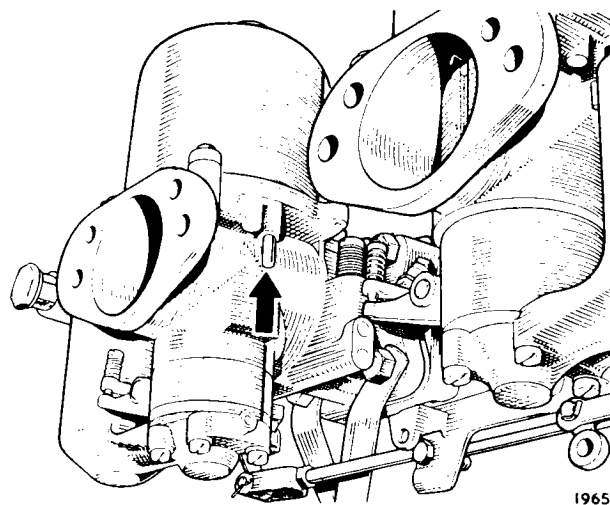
The carburetter piston lifting pin; the first part of the movement is spring loaded free travel
